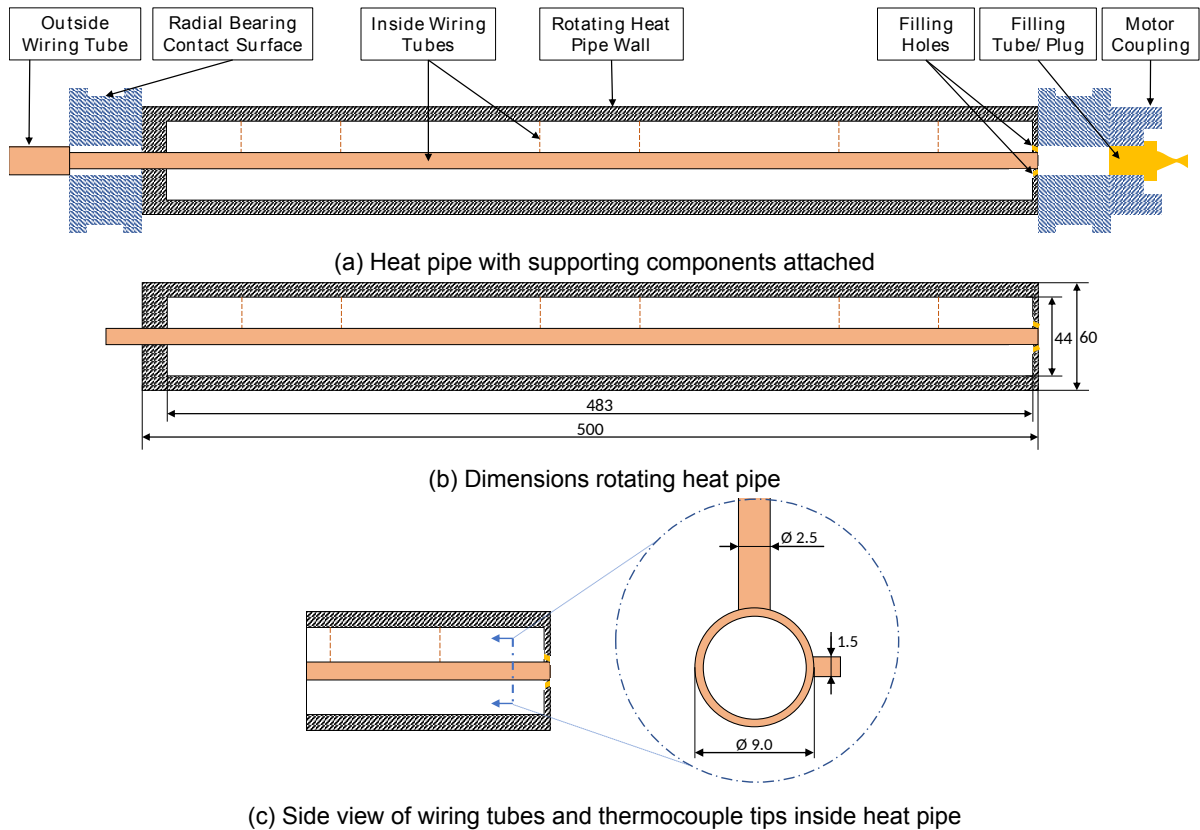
Scaled drawings of a cross section of the heat pipe. Dimensions in [mm]
